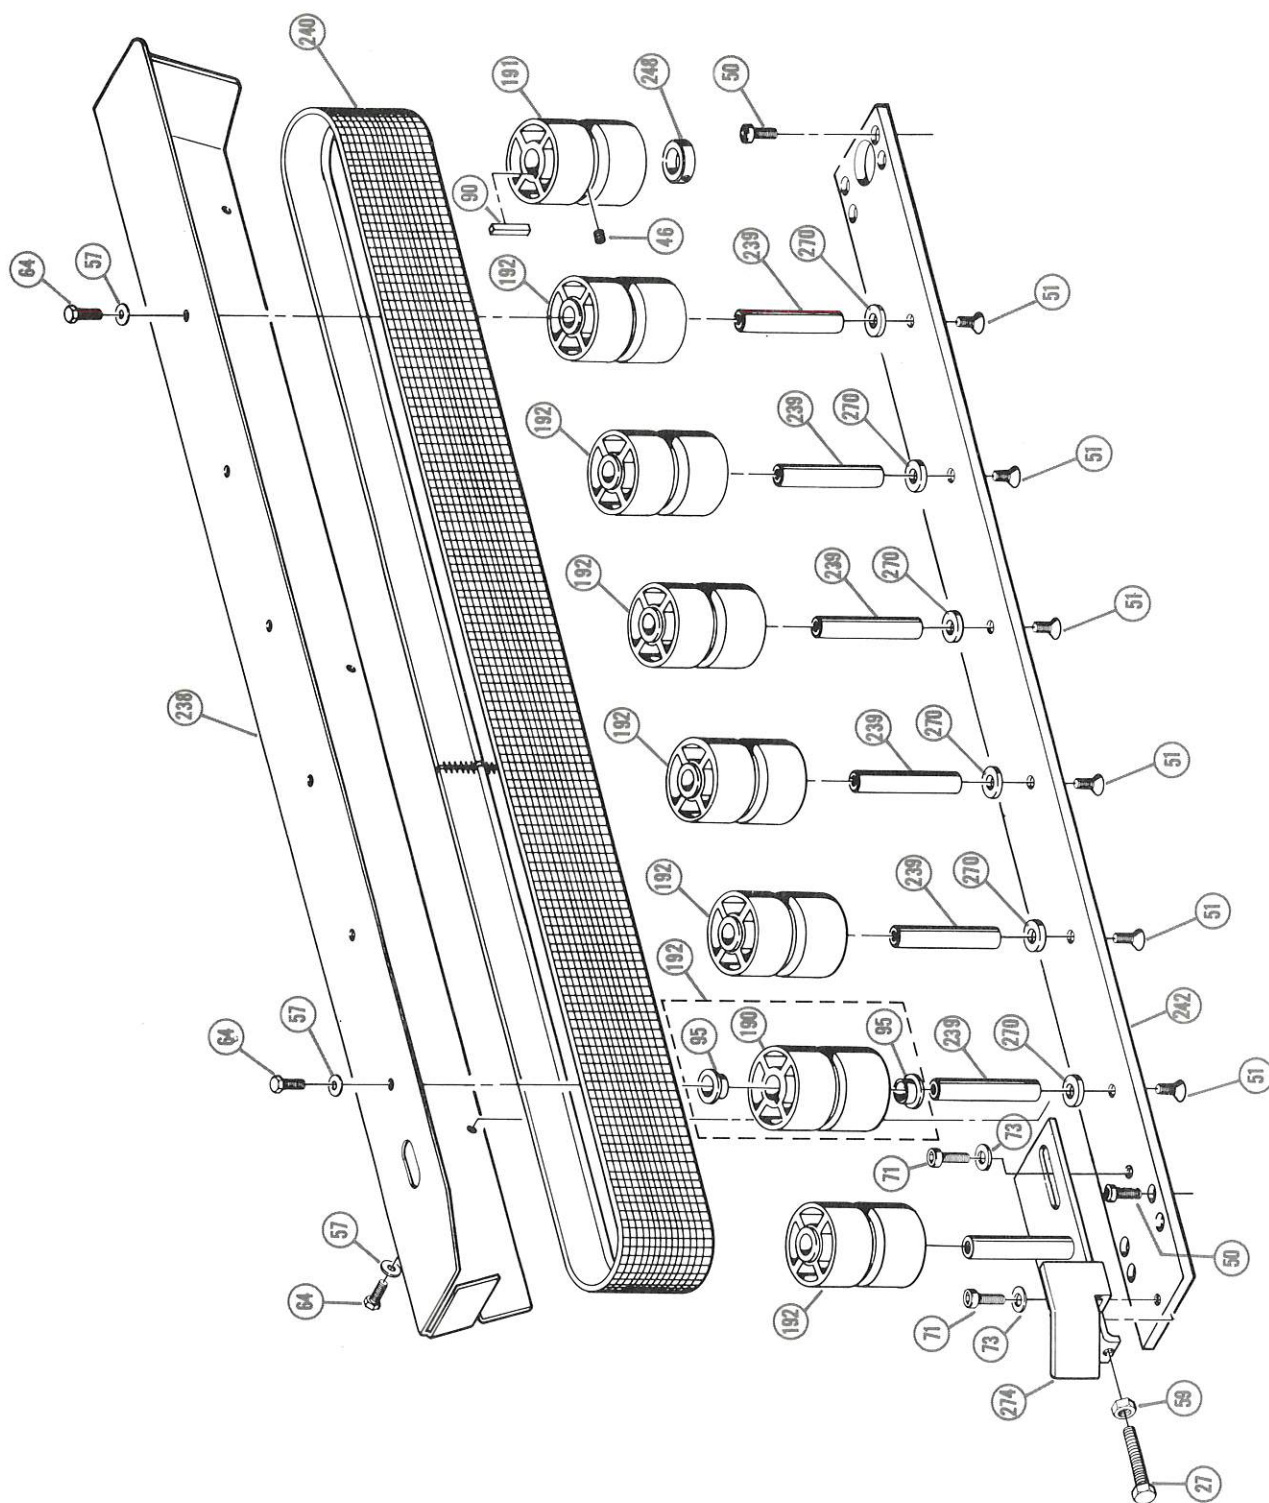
LEFT SIDE BELT DRIVE ASSEMBLY
